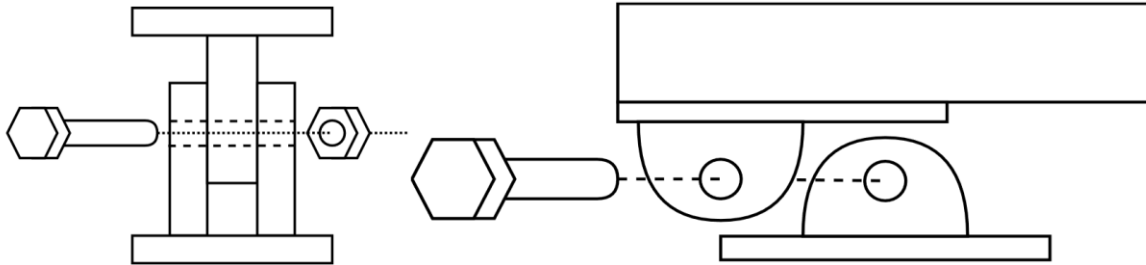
Sketch of mounts used to secure the model bridge to the test bench
